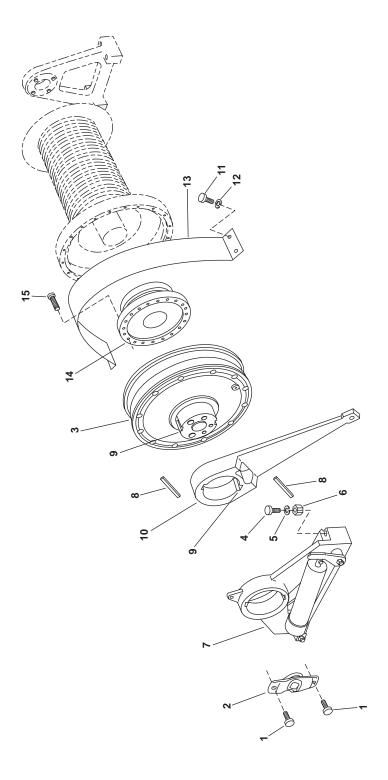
Hydraulic Motor, Front Bracket, Torque Arm, and Shaft Adapter Assembly
